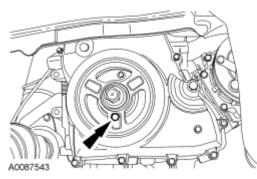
Aligning Crankshaft Pulley Bolt Holes Courtesy of FORD MOTOR CO.
